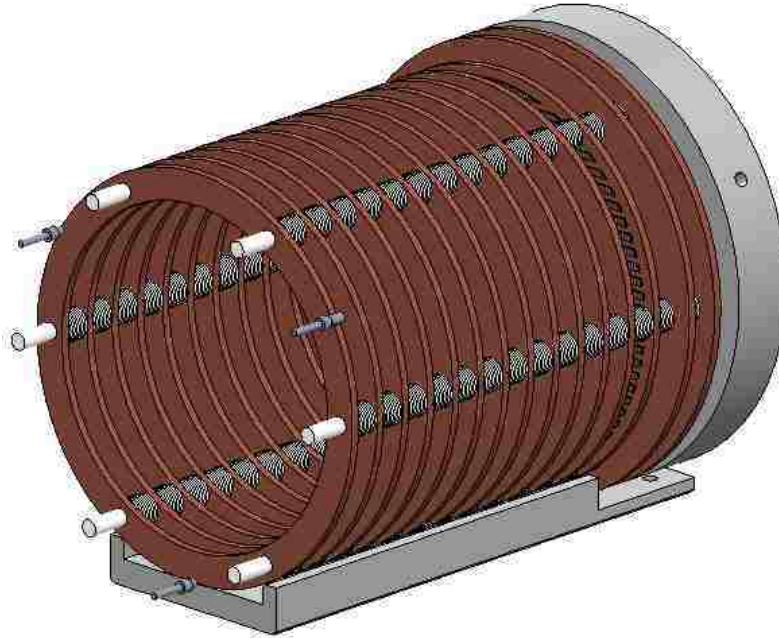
Solid CAD model of the anode-guard ring sub-assembly.
